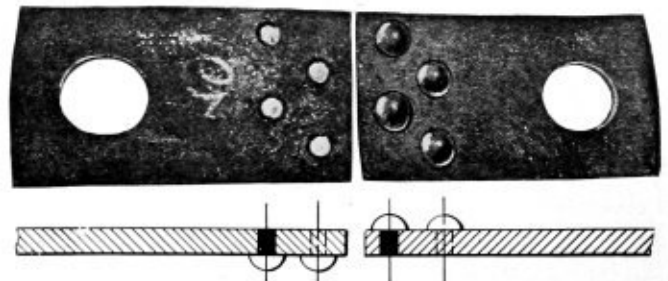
Section of Joint, Showing Result of Rivet Shear
